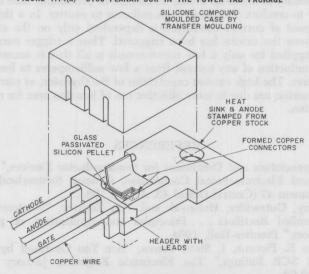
(b) PICTORIAL VIEW OF THE POWER PAC ASSEMBLY
